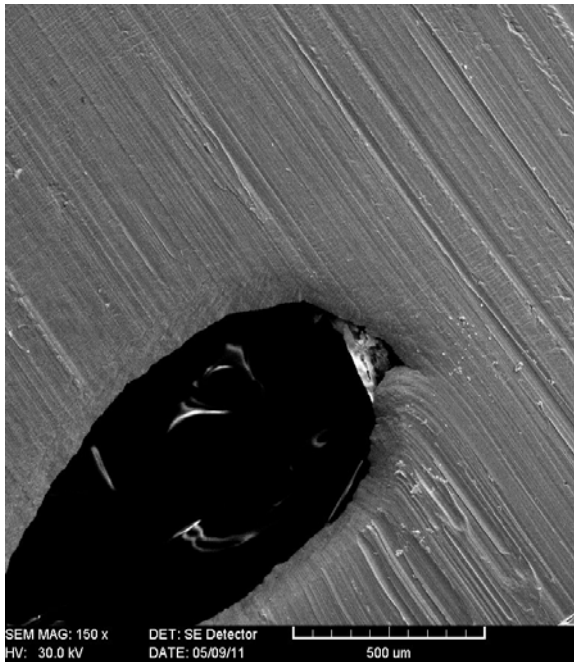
Fractured surface of Au-20Sn solder with a partial tearing-off of Cu substrate.
